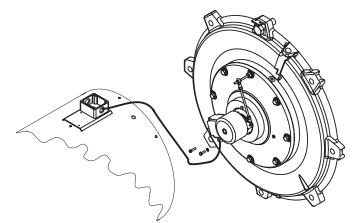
Replacing the sensor for the air-cooled 1FW4 motor
